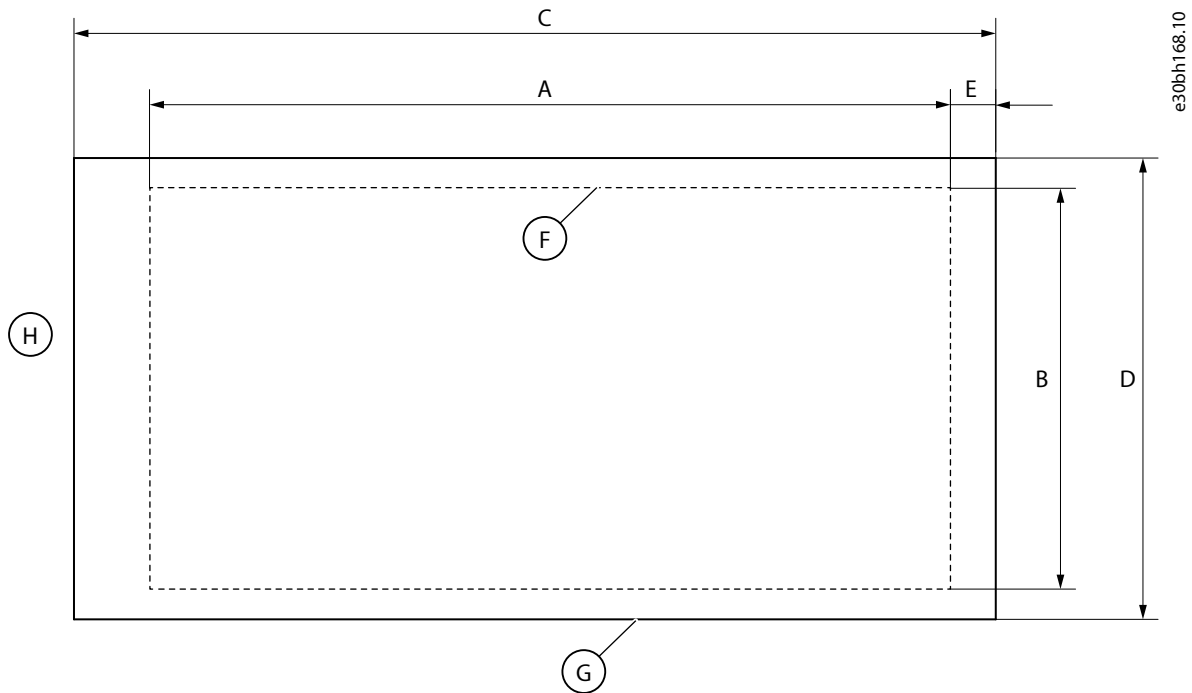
Dimensions of the Opening and Drive Outline with Flange
